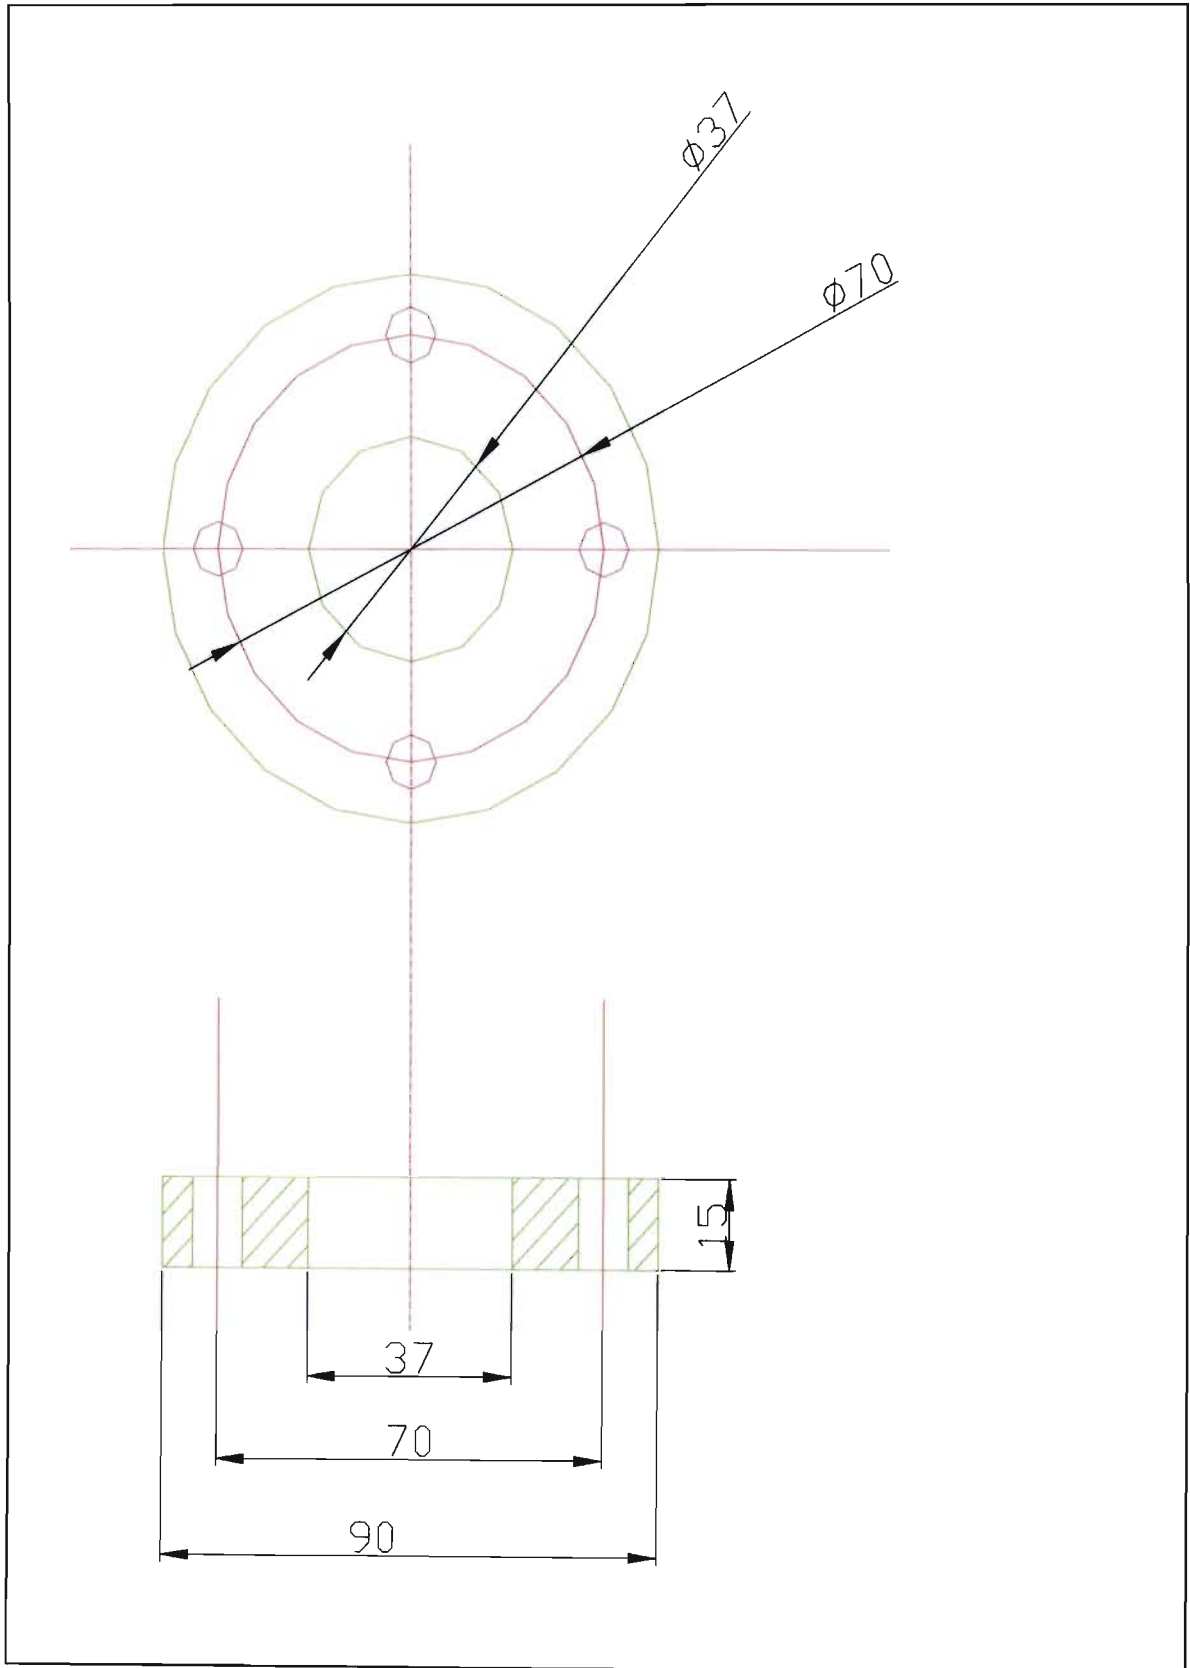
Drawing Design of the Flanges of Convoluted Heat Transfer Pips
